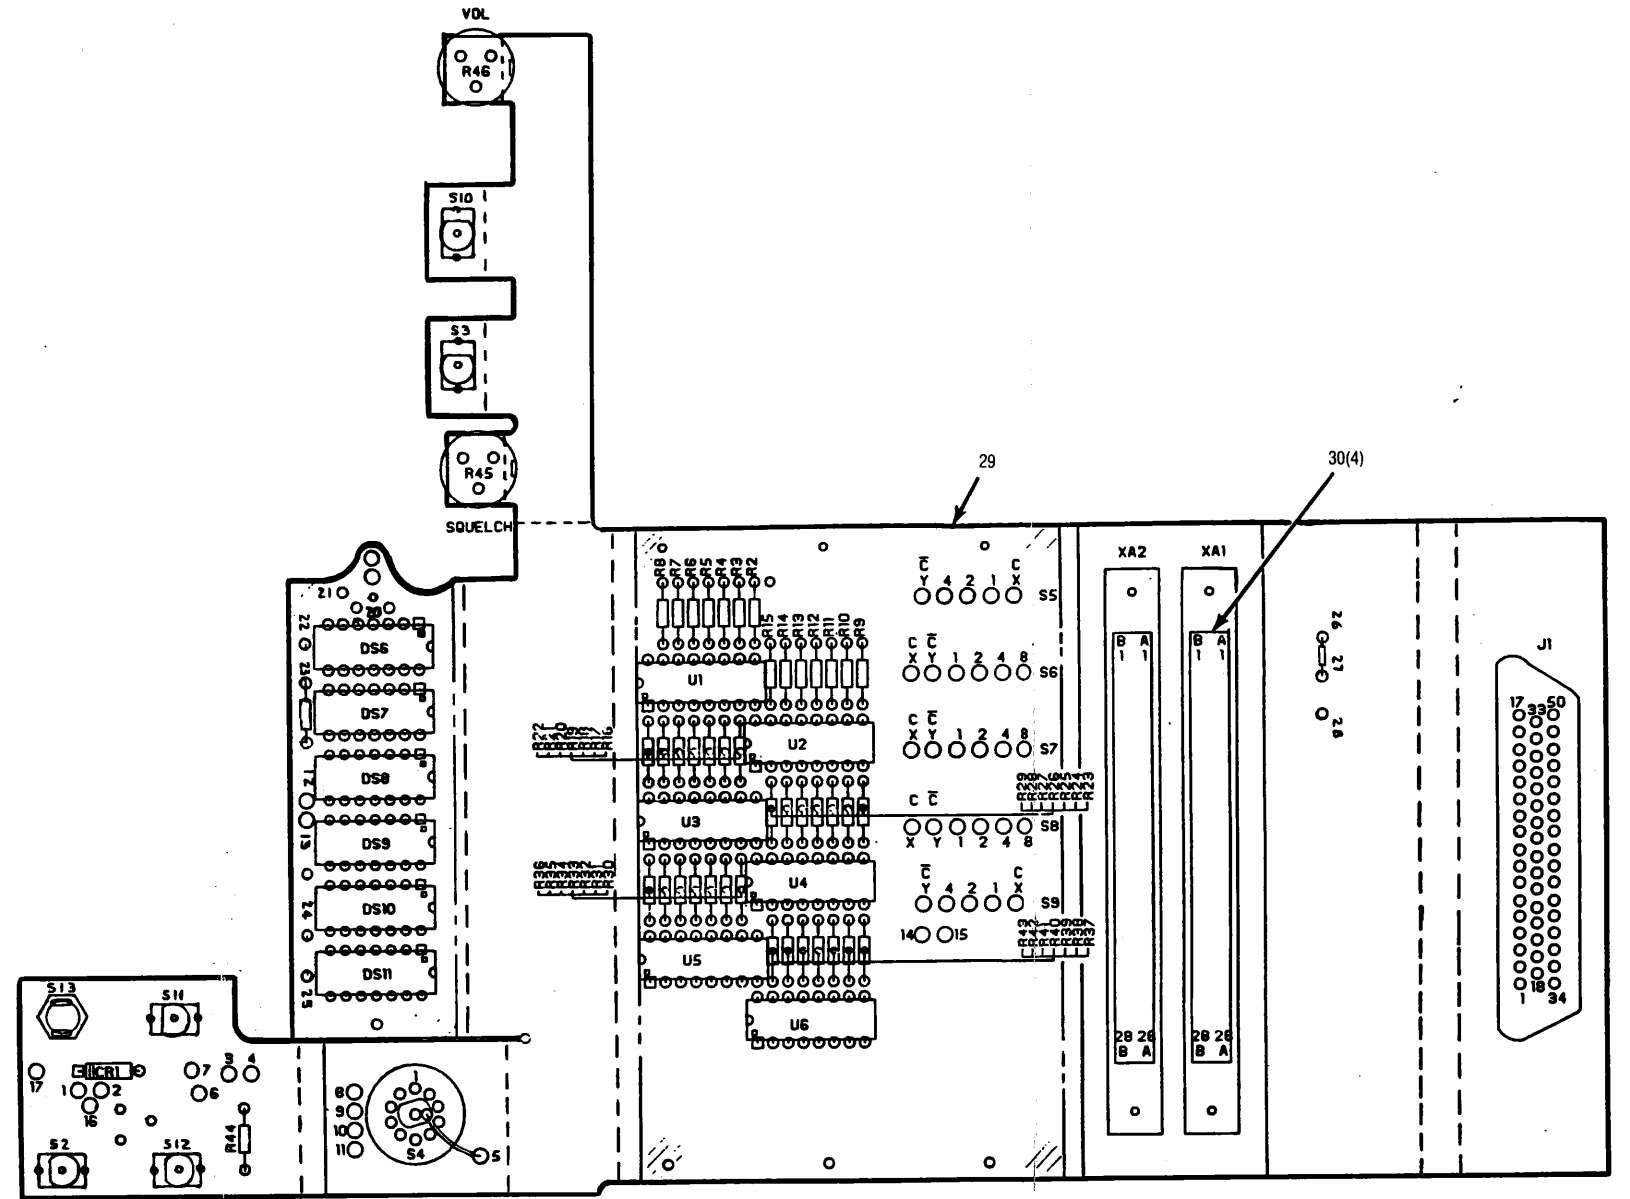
Remote Control Unit 1A1 Showing Location of Components and Major Assemblies (Sheet 2 of 2)
